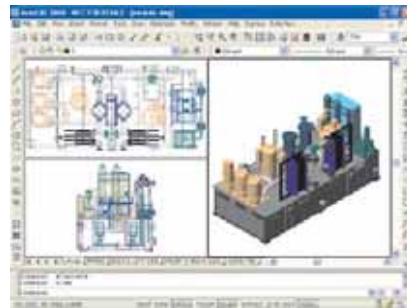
A 3D drawing created with a typical CAD system. With the proper tools, 2D and 3D images of the object being designed can be generated. (Autodesk, Inc.)
